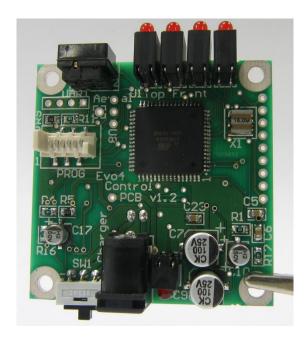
Rigid PCB Example; An image containing an example of rigid PCB; reprinted with permission from User:Mike1024
